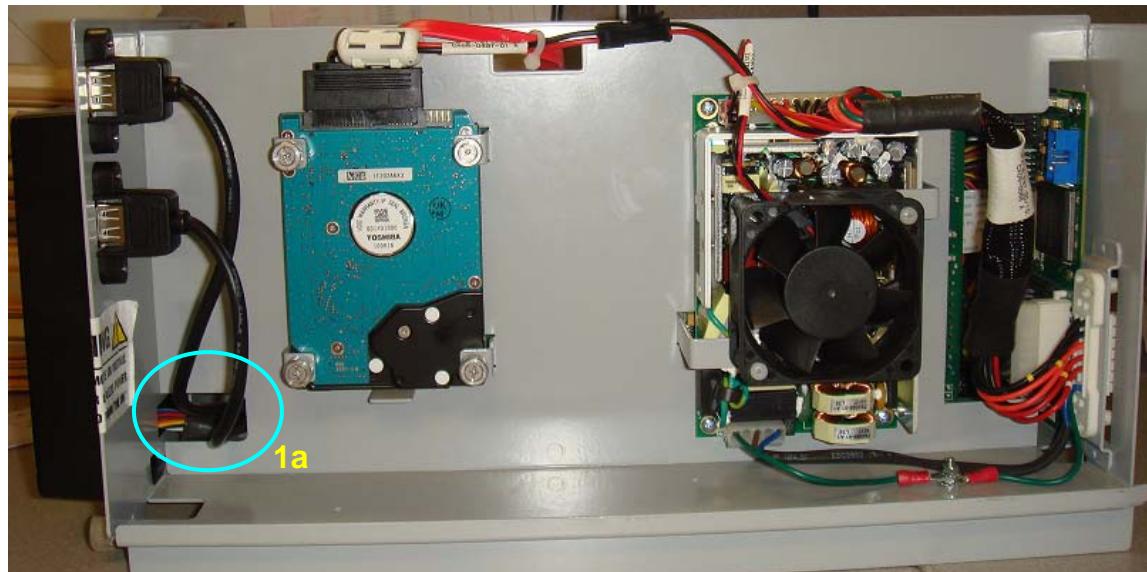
Attaching the New USB Extension Cable to the Electronics Tray
